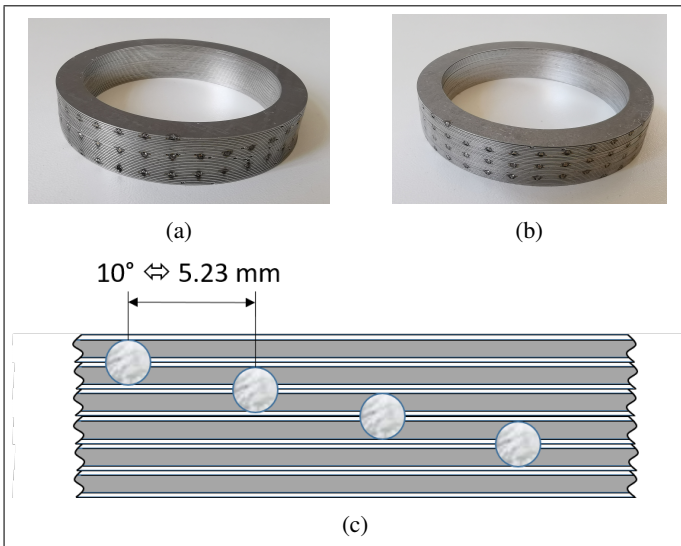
(a) spot welding Sample with 3 spots per ring, (b) spot welding sample 4 spots per ring and (c) Illustration and distribution of the spot welded point
